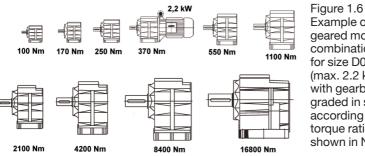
Example of possible geared motor combinations for size D09 motor (max. 2.2 kW) with gearboxes graded in size, according to their torque rating shown in Nm
